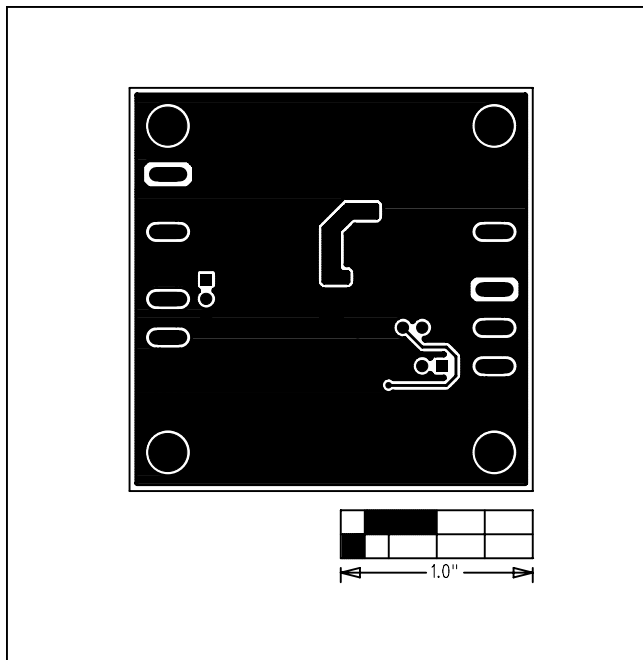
MAX17504 5V Output EV Kit PCB Layout—
